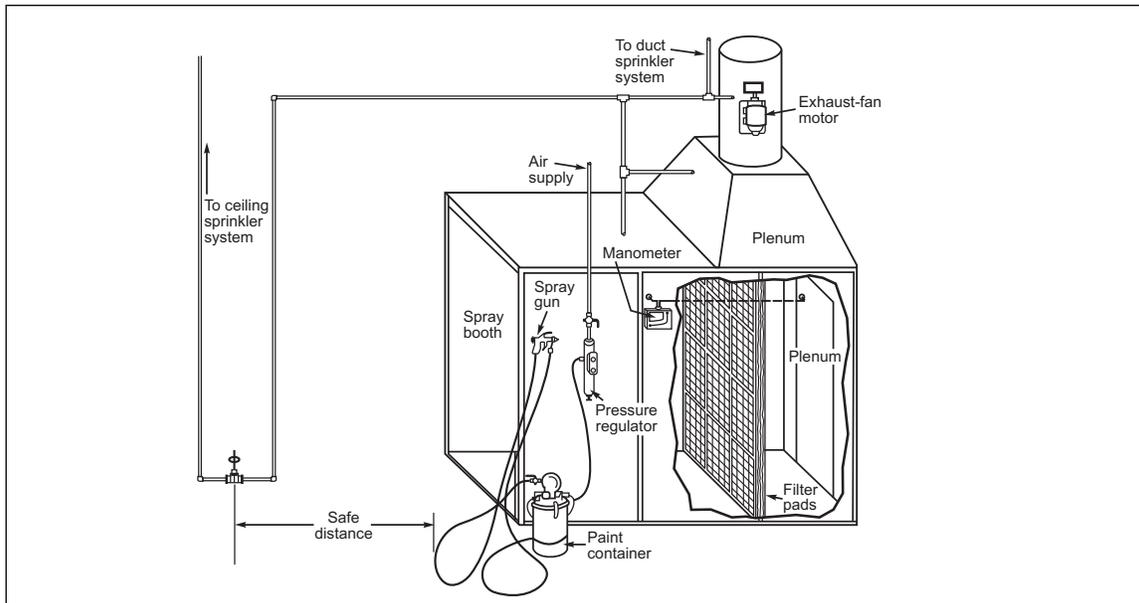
Dry filter (open-face) spray booth equipped with filter pads; gauge used to indicate minimum air velocity is also shown
